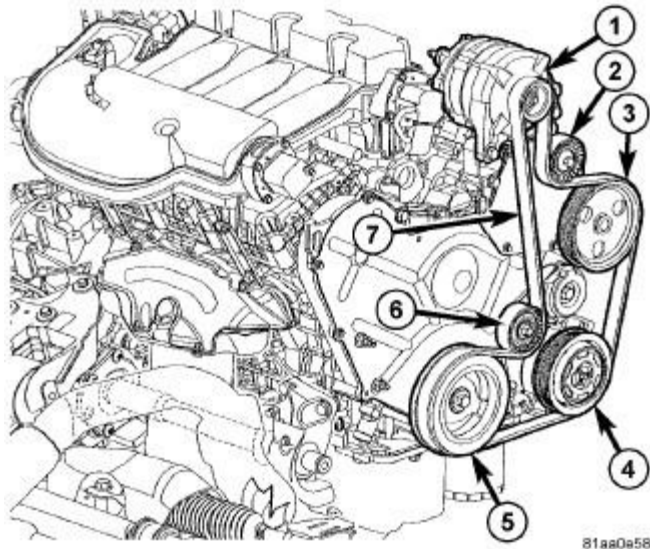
Identifying Accessory Drive Belt & Pulleys
